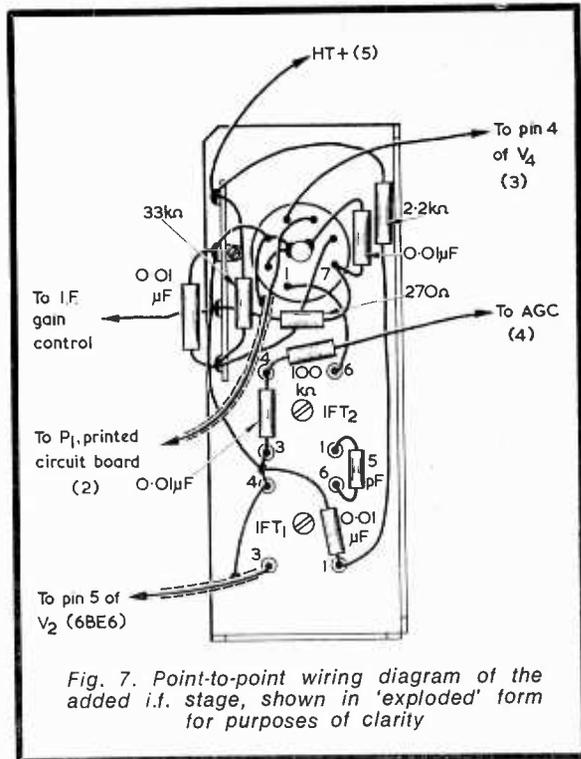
Point-to-point wiring diagram of the added i.f. stage, shown in 'exploded' form for purposes of clarity
